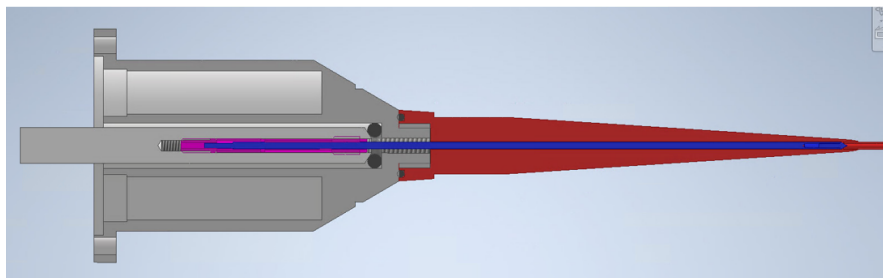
CAD drawing showing the complete GIS assembly with the modified needle.
